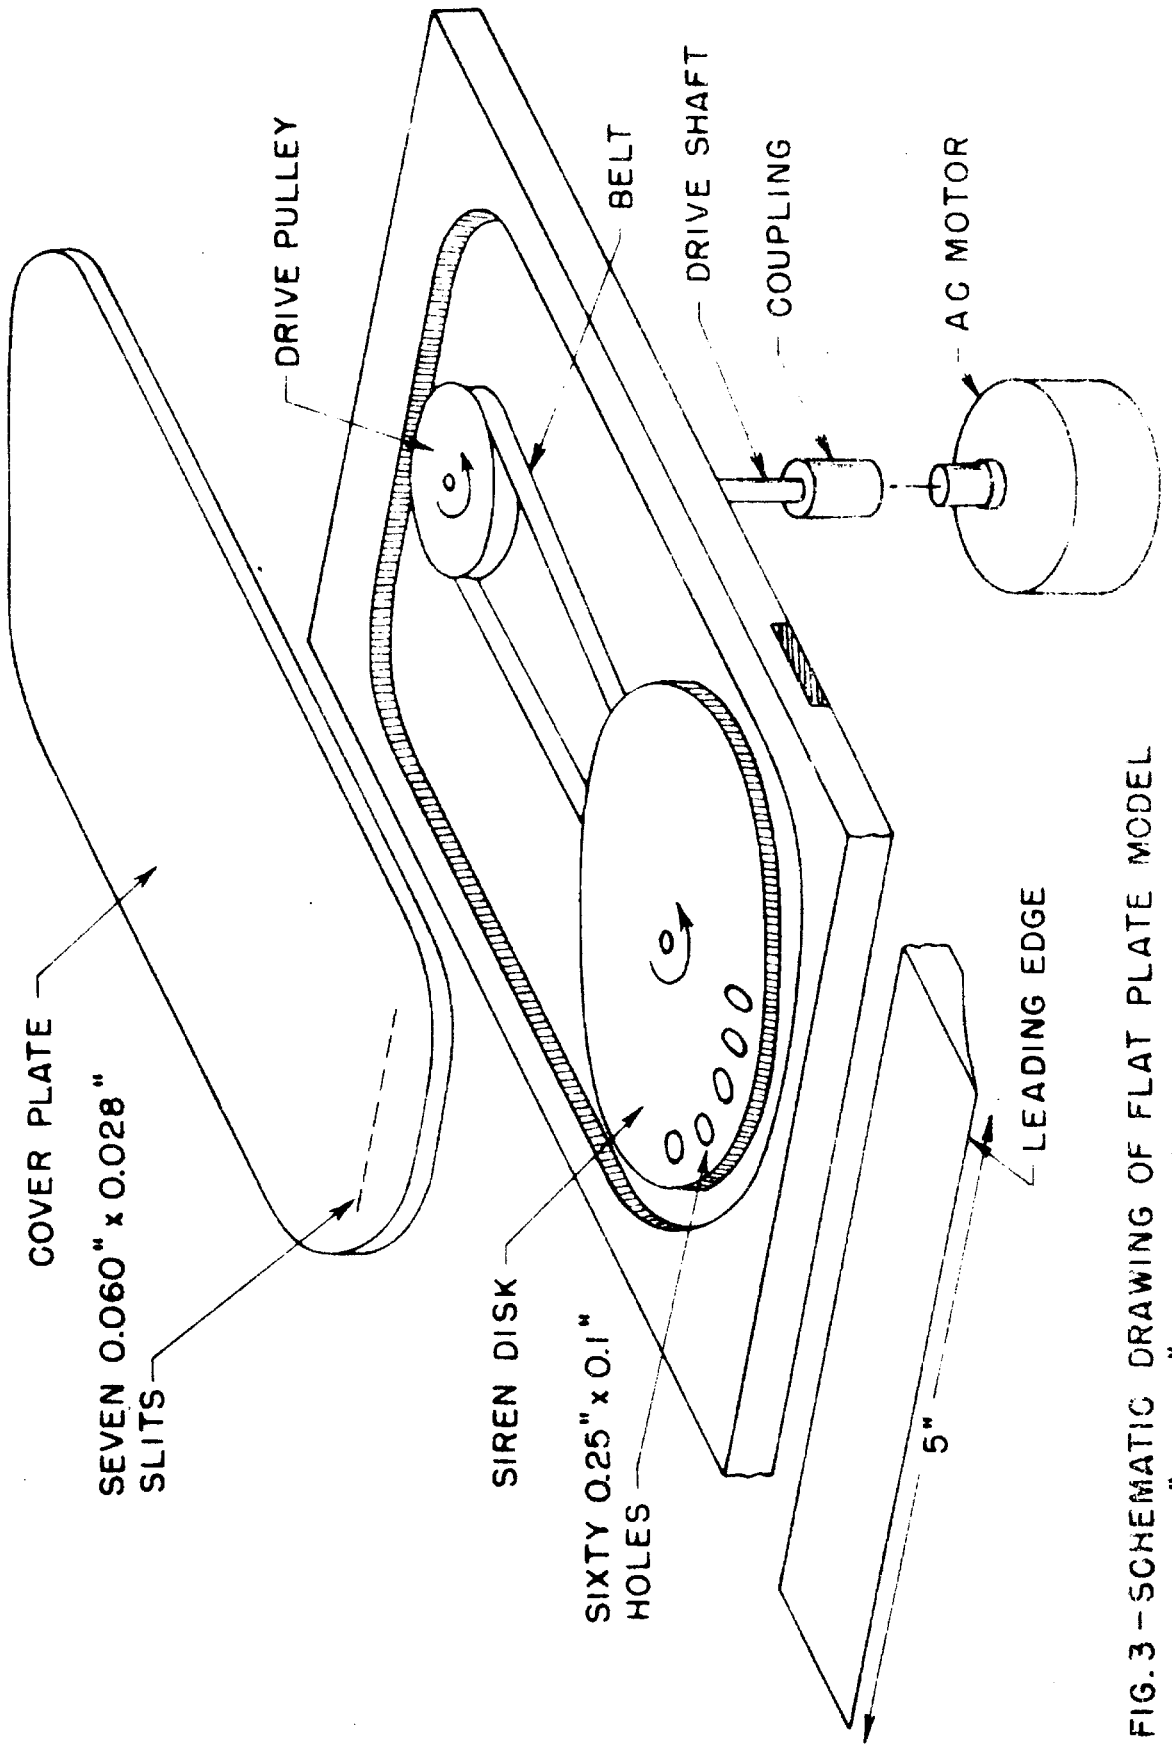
SCHEMATIC DRAWING OF FLAT PLATE MODEL WITH "SIREN" MECHANISM
